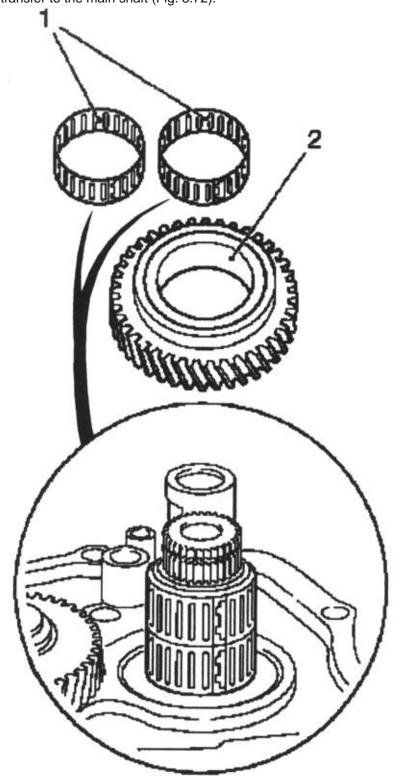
Installing the gear 5-th transmission the main shaft:
